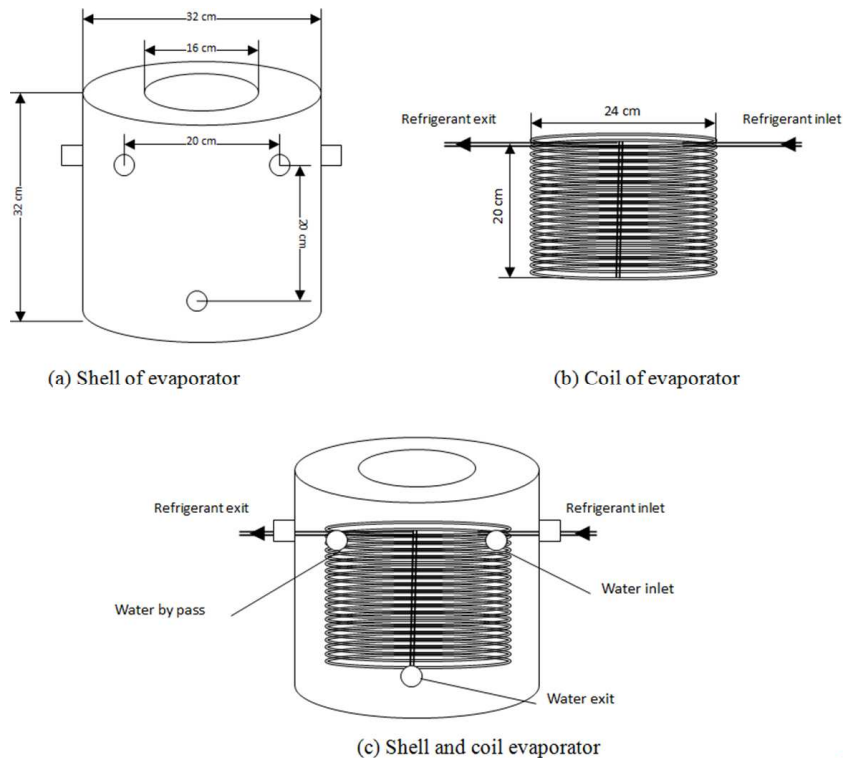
A schematic diagram of the shell and coil evaporator, Mahmood [6].
